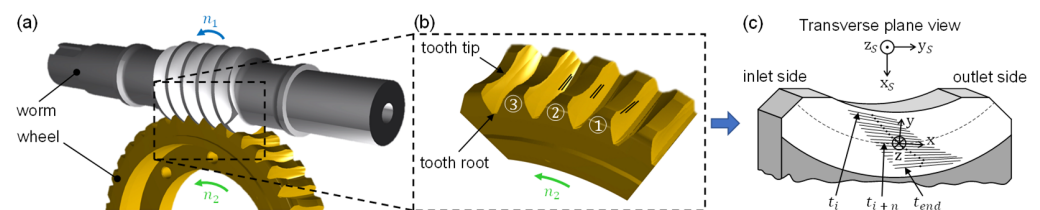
(a) Considered worm gear; (b) zoomed section of the wheel showing selected meshing positions; (c) schematic area of gear contact on the wheel.
